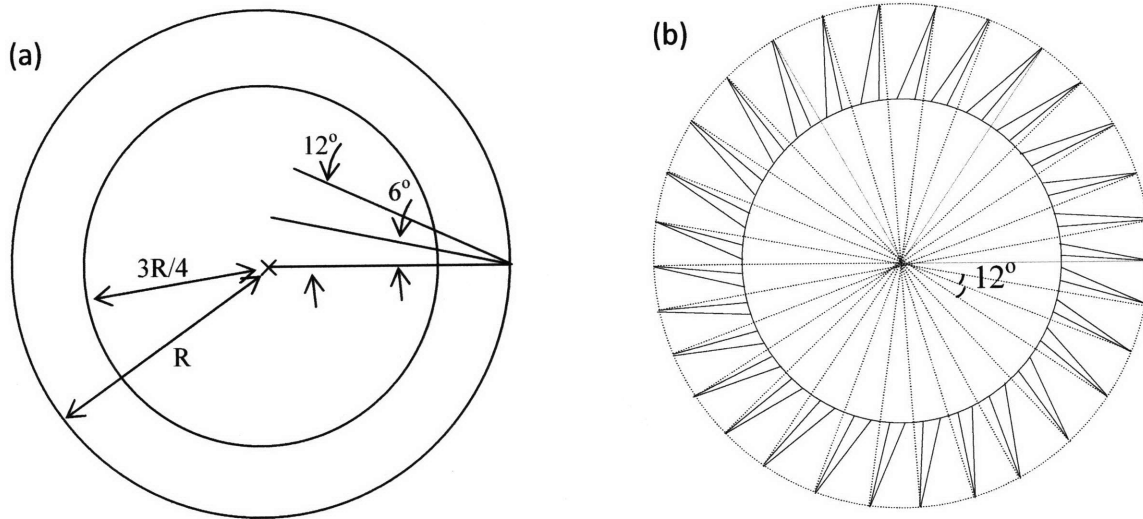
Construction lines used to draw the escape wheel teeth.
